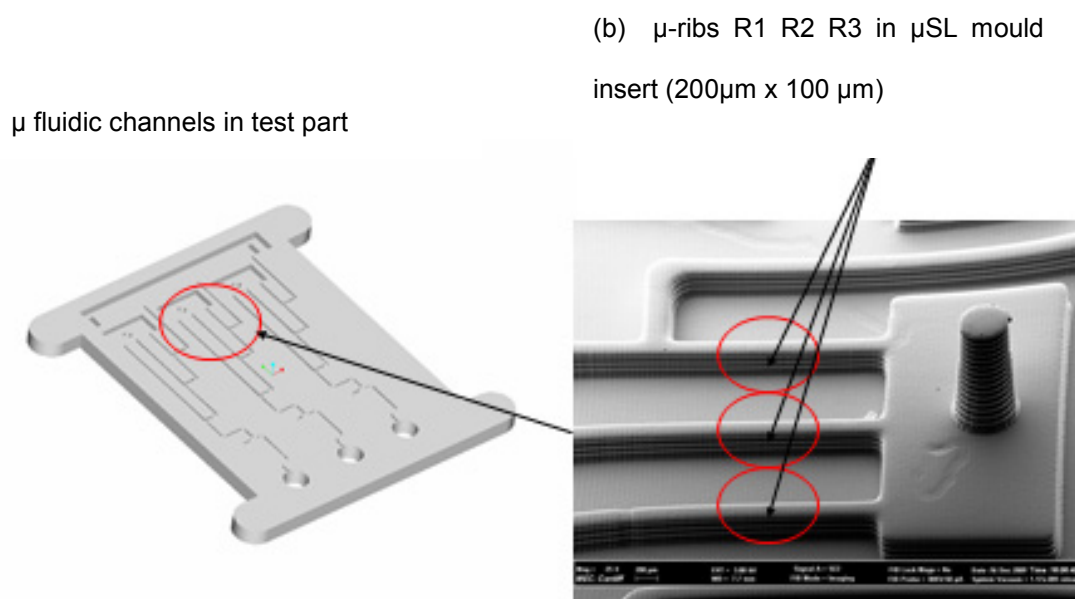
Part and mould designs: (a). Micro fluidic part design; (b) micro features of  $\mu$ SL mould insert
